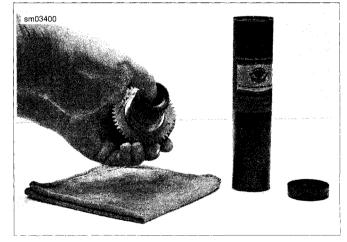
Lubricating Main Drive Gear Needle Bearing
